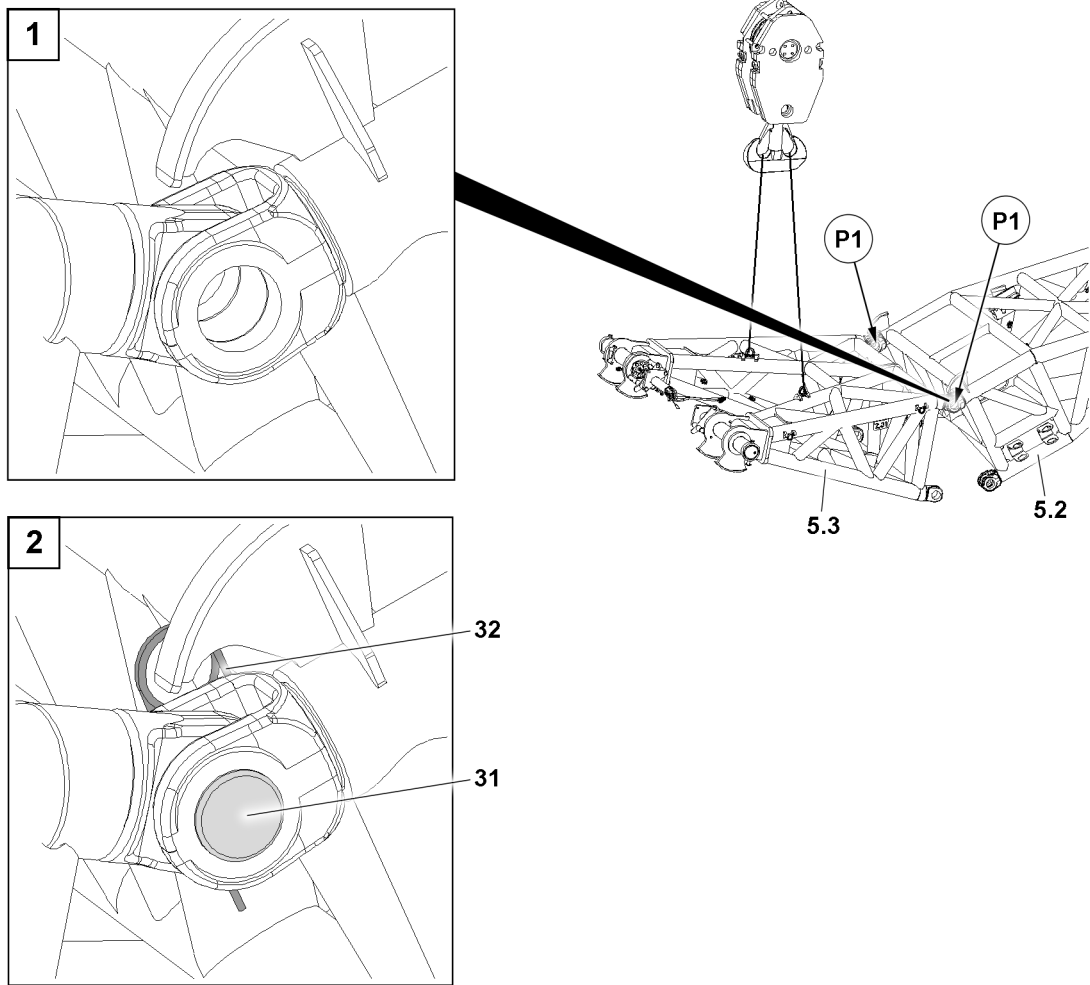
Disassembling the end section – Unpinning the end section at the top
